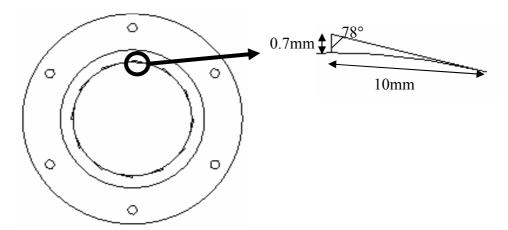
Detailed view of a groove from the front view of the vessel at the cake outlet section
